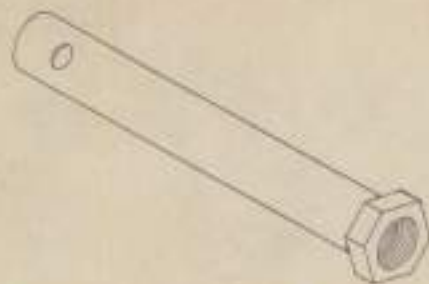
Suggested tool for removing the "Power Director" clutch outer (hollow) shaft from D-17 models can be made by welding a pipe to a nut (Allis-Chalmers part No. 229428). This tool can be screwed on the shaft in-place of the standard nut and the pipe can be bumped rearward withdrawing the bearing cones, cups, spacer and the outer shaft.
